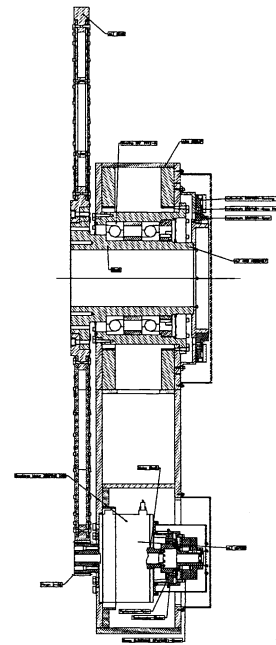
A section view of one arm integrated with the main gear, the bearings, the servo drive and the axis encoder.
